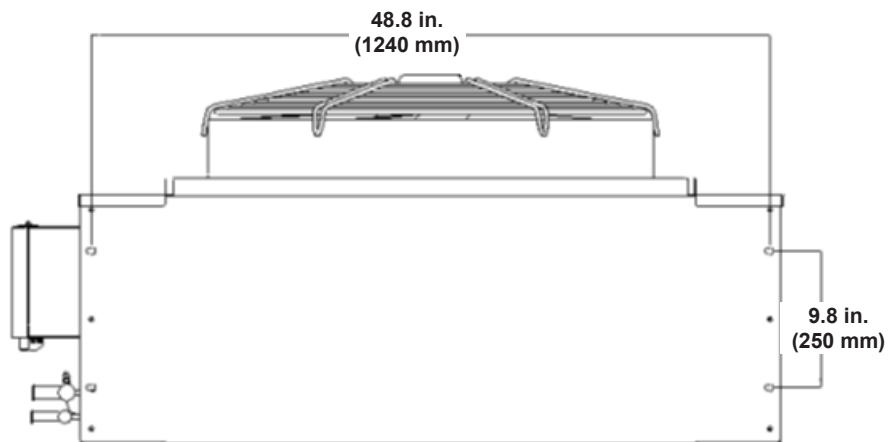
Condenser Mounting Interface (side mounted, bottom view looking up), SRCOOLDXRW25 (vertical installation)
